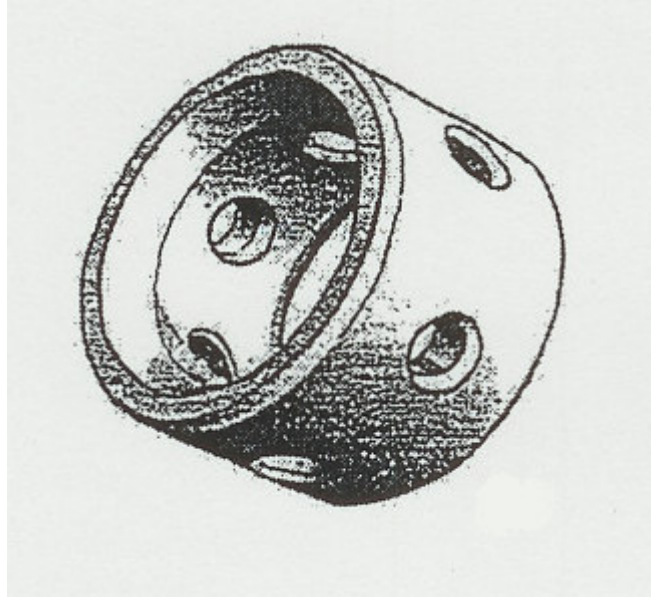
Floating Ring Bearing with Six-Oil Groove [8]
